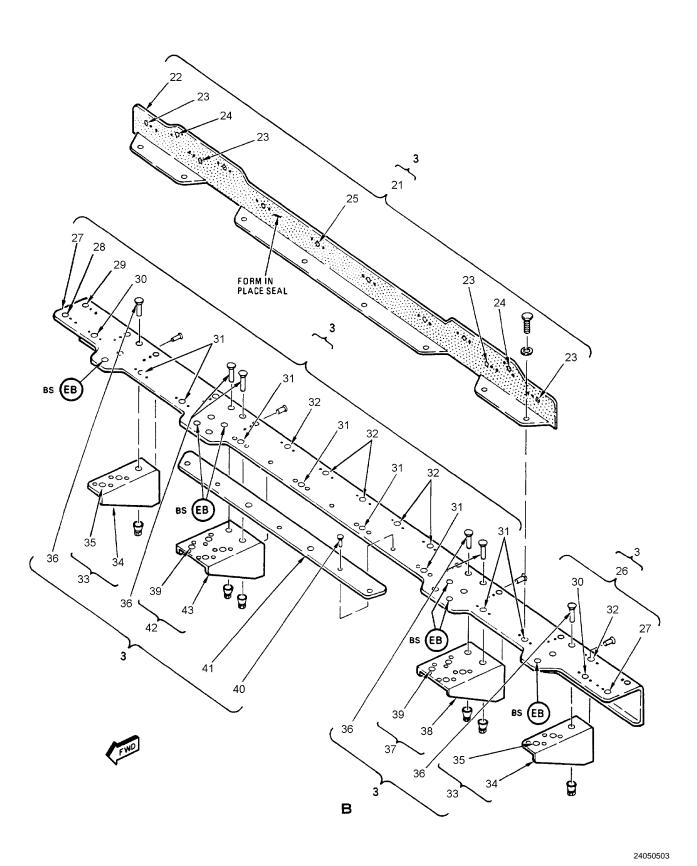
Upper and Lower Support Assemblies (Sheet 3)
